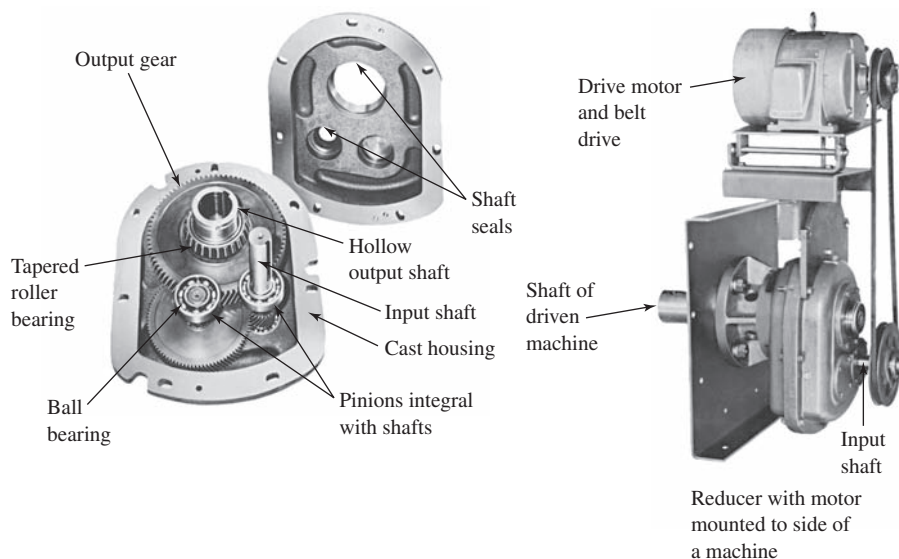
Helical shaft-mount reducer (Power Transmission Solutions, a business unit of Emerson Industrial Automation)
